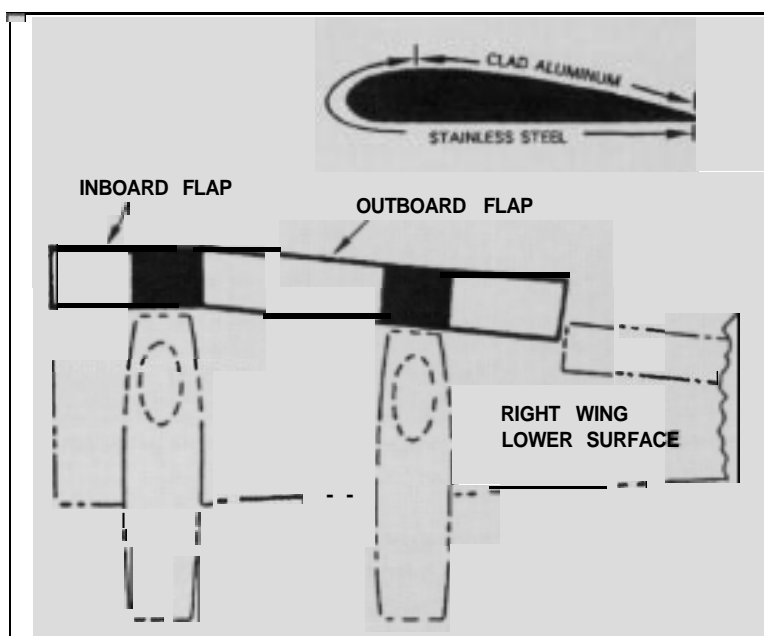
Wing flap skins of stainless steel sheet of 301 alloy are more resistant to fatigue cracking and corrosion than either aluminum or titanium.
